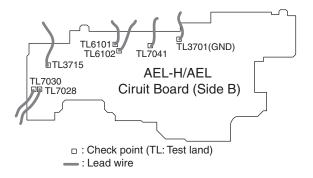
Lead wire soldering of AEL-H/AEL circuit board
